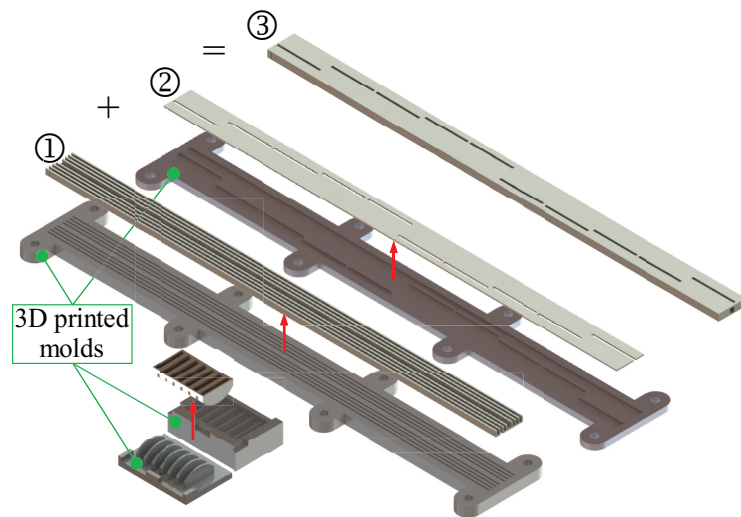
Design of the robot parts' molds and basic fabrication process of the robot parts.
